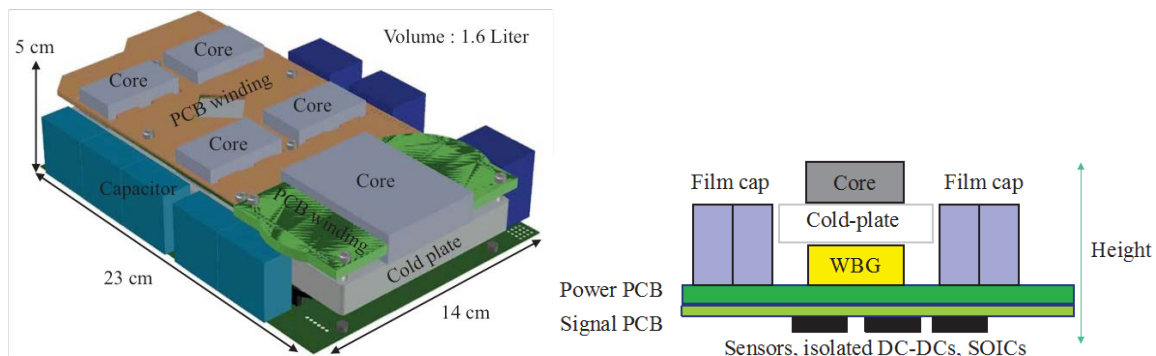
High-density composite boost mechanical design. Left: CAD drawing of assembled unit. Right: Side view of mechanical layout. An off-the-shelf cold plate provides water cooling, with ferrite cores mounted on top side and wide bandgap semiconductors mounted on bottom side. A PCB with high-weight copper provides power interconnects, and a PCB with conventional copper provides gate driver and signal interconnects.
